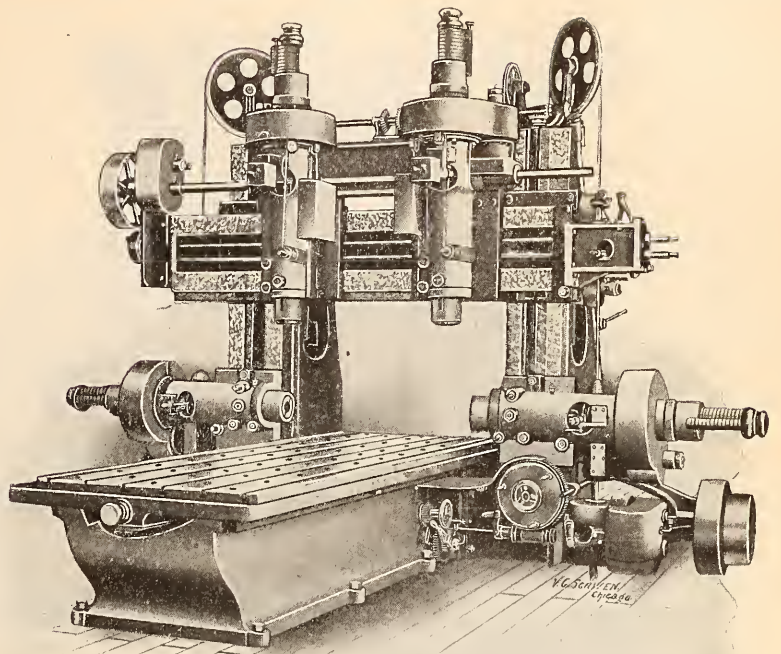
FOUR HEAD MILLING MACHINE—MANUFACTURED BY INGERSOLL MILLING MACHINE COMPANY, ROCKFORD, ILL.
